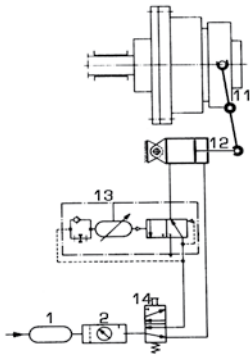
pneumatic - mechanical operating device of a Conax® clutch, type CM, hand actuated and with automatic release of the operating system:
